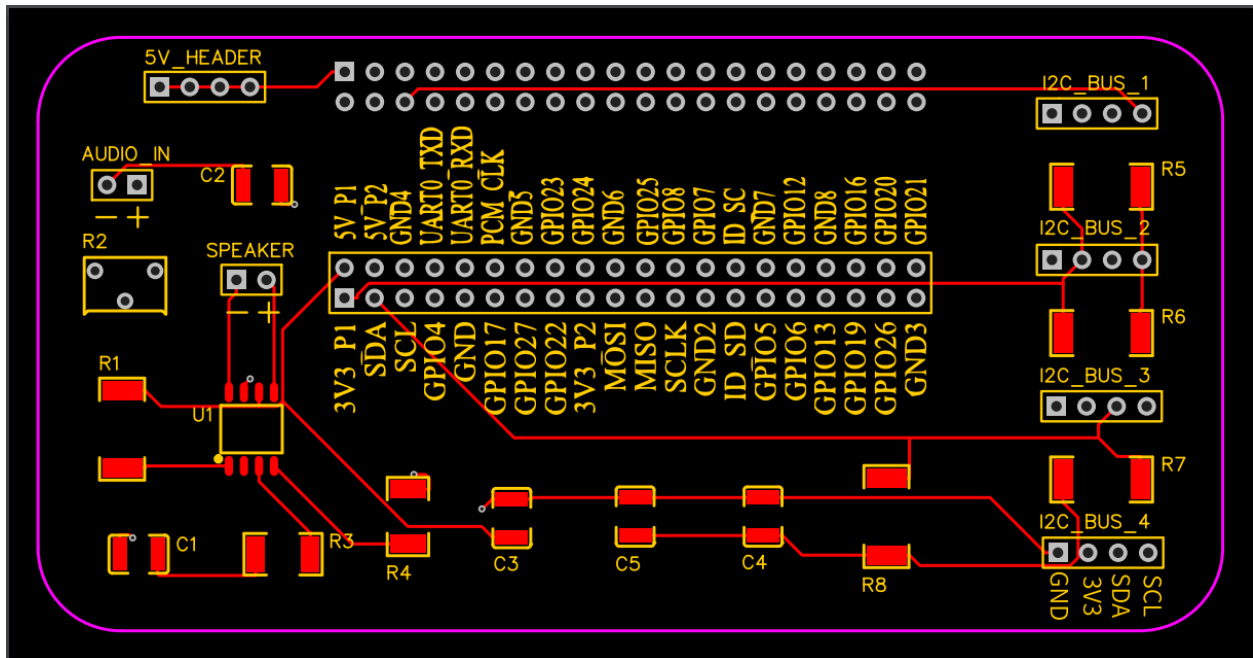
PCB layout. Printed on a 100x50mm board. Component values are shown in the “Part Information” section of this guide.
